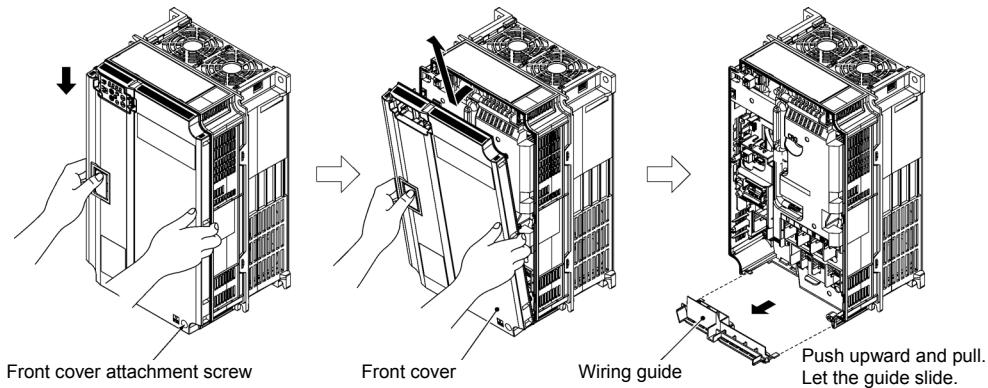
Removal of the Front Cover and the Wiring Guide (for FRN0072E2■-4□)
